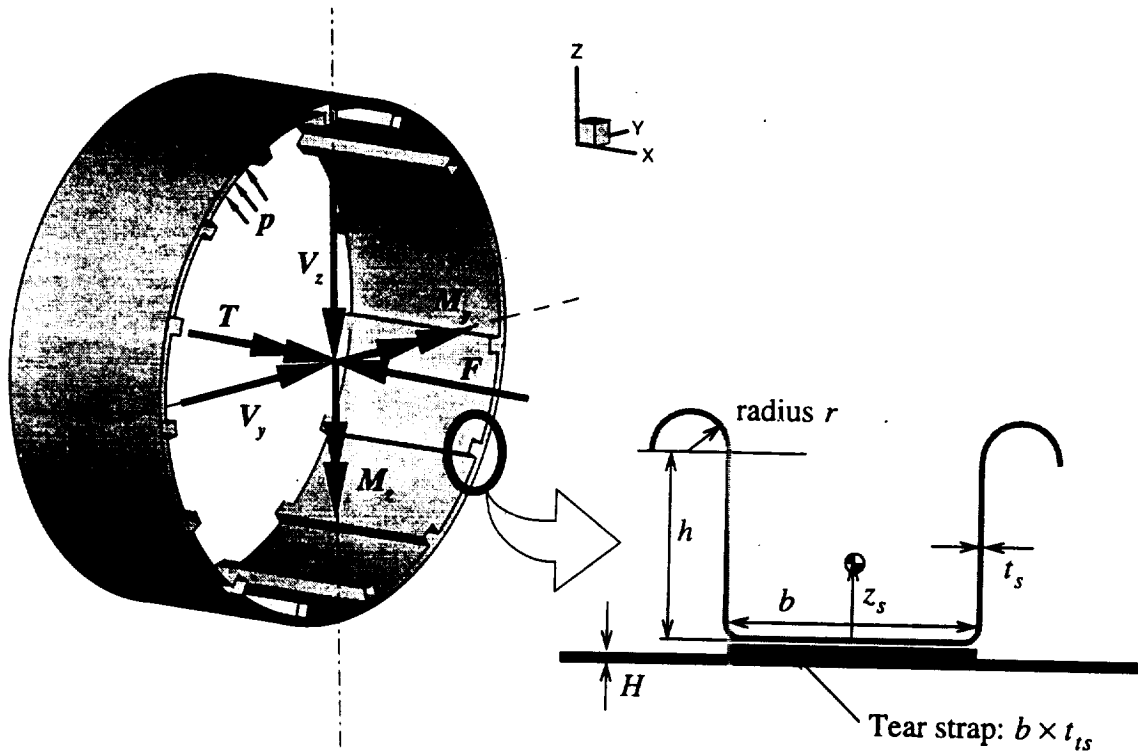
Geometry of Cross-section and Stiffener Arrangement for Short Segment
